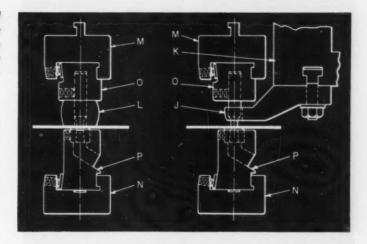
Press brake equipped with combination dies and spring-loaded ejectors, employed for piercing and notching sheets for refrigerator cabinets.
